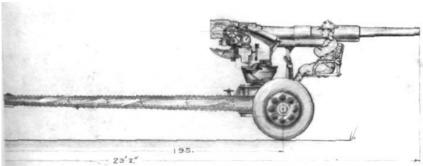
75 MM. GUN ON T3 MOUNT BEING TOWED
